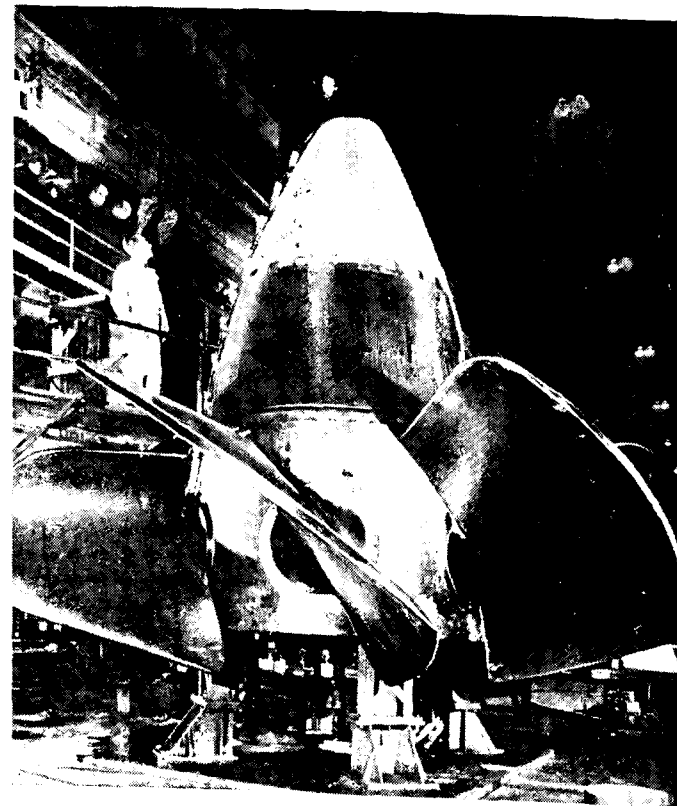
Works assembly of water turbine runner for Priest Rapids.
